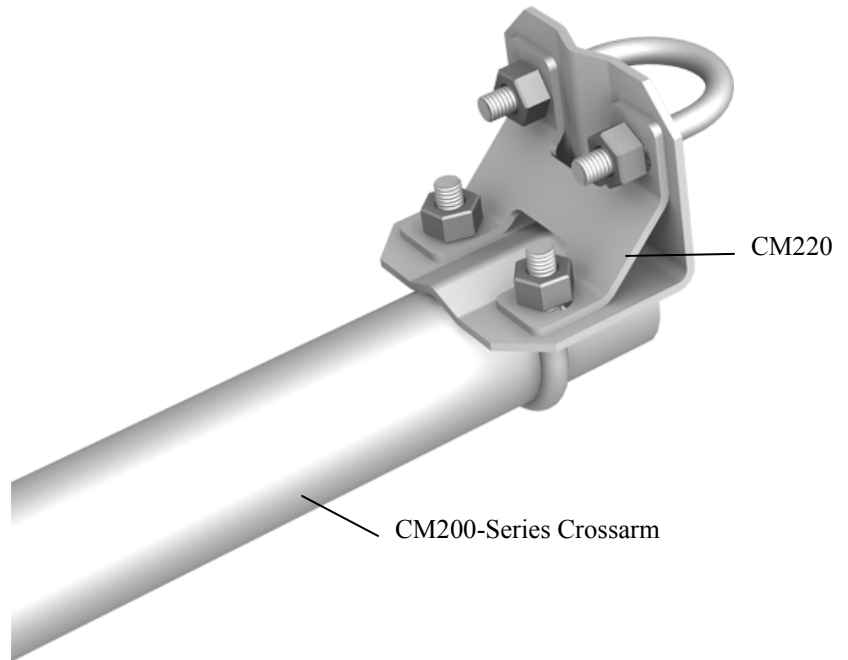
CM220 Right Angle Mounting Kit mounted to a crossarm
